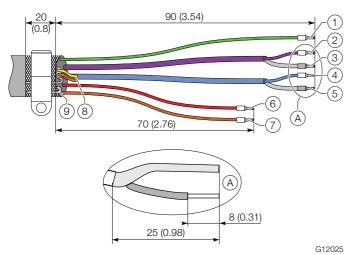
Signal Cable Part No. D173D031U01, Dimensions in mm (inch)
